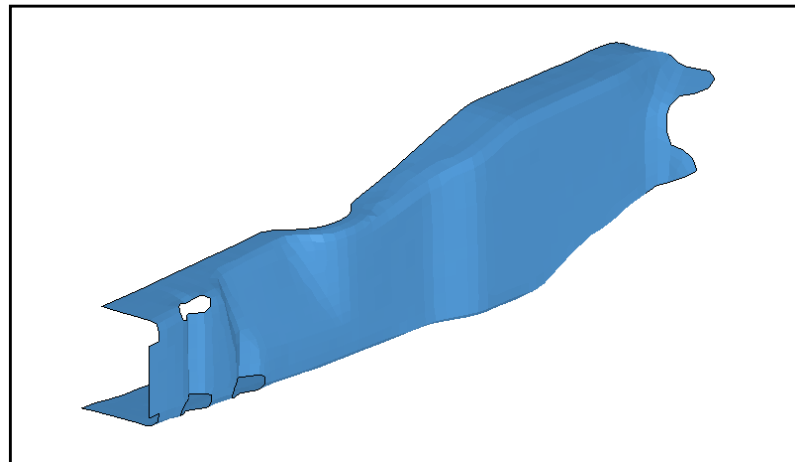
Part 2000157 – Inner side of the front right S-rail
